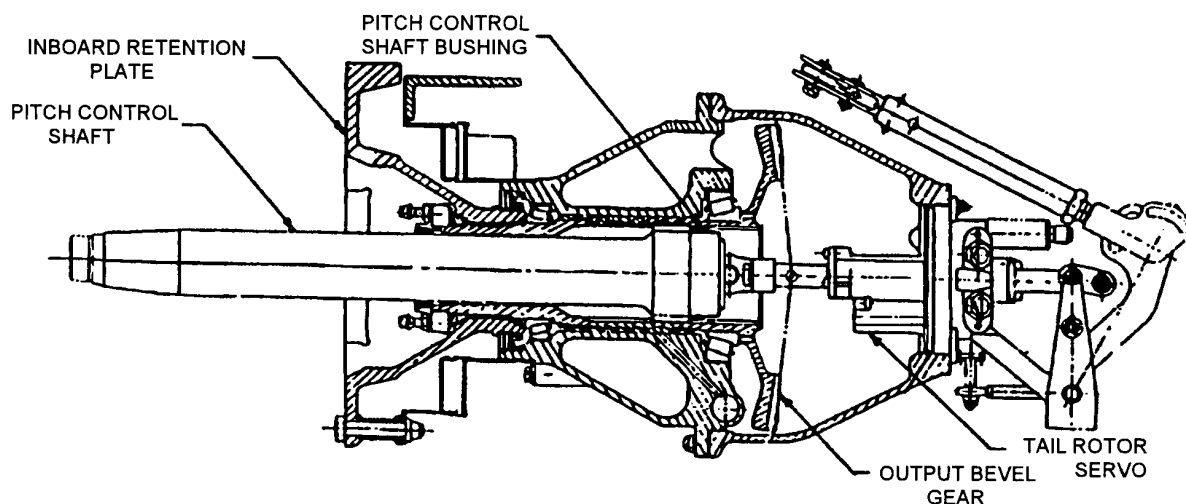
Tail Rotor Gearbox, Tail Rotor Servo, & Pitch Control Shaft Assembly
